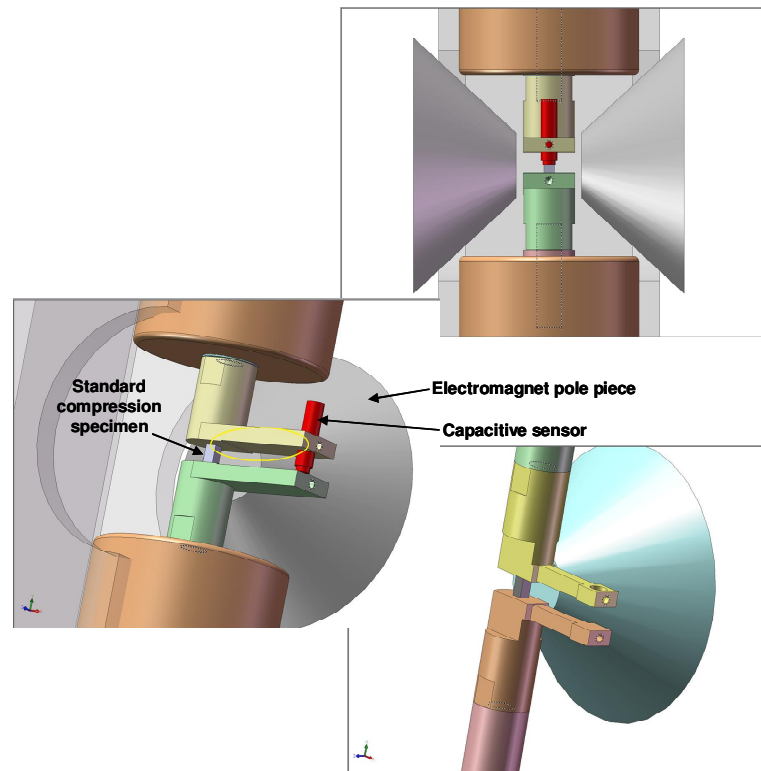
3D CAD models assembly consisting of the magnet pole pieces, capacitive displacement sensor, grip body, grip head, heating/cooling assembly and polymer chamber half created during the design phase of the custom narrow grip heads for compression.
